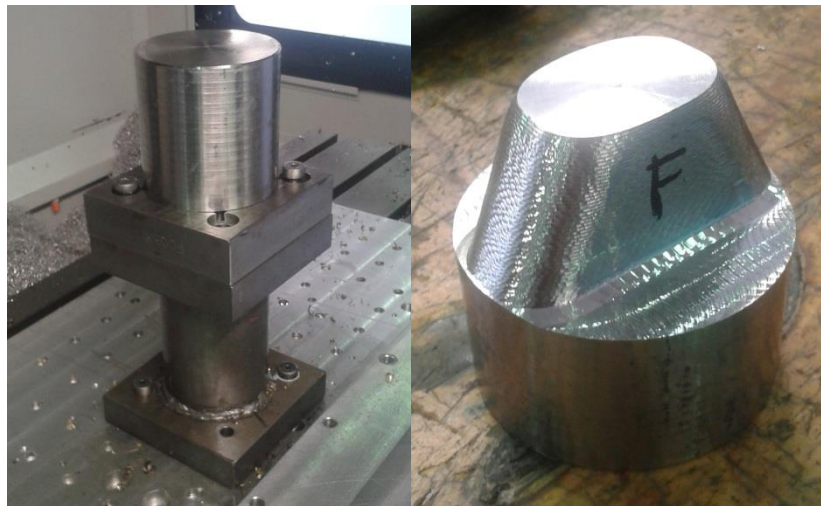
Billet mounted in machine (left) and lug rib with roughing process finished (right)
